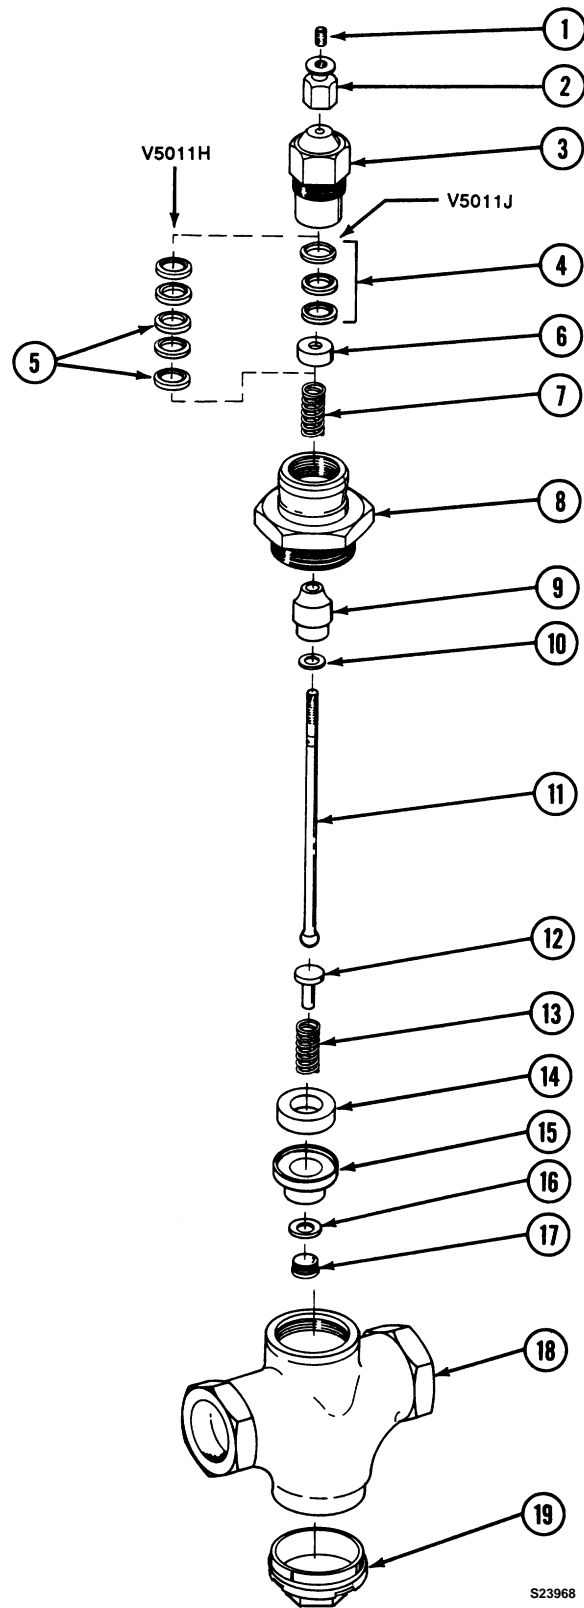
V5011H and J Threaded Body Reverse Acting Valve—Exploded View.
